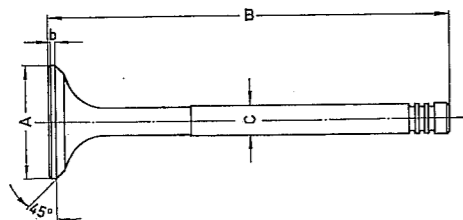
Critical valve dimensions - Inlet & exhaust.
